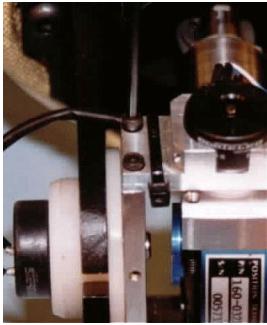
Reassembly of the yoke arms and gimbal assembly
